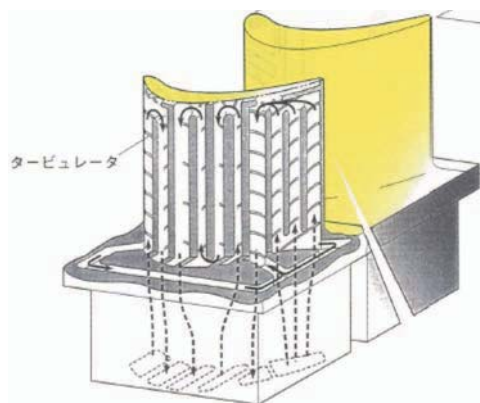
Cooling structure of the rotor blades (Full closed steam cooling, MHI)¹²⁾
